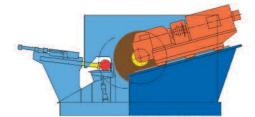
Type L - chop-stroke cut-off machine with linear-guided cutting head
